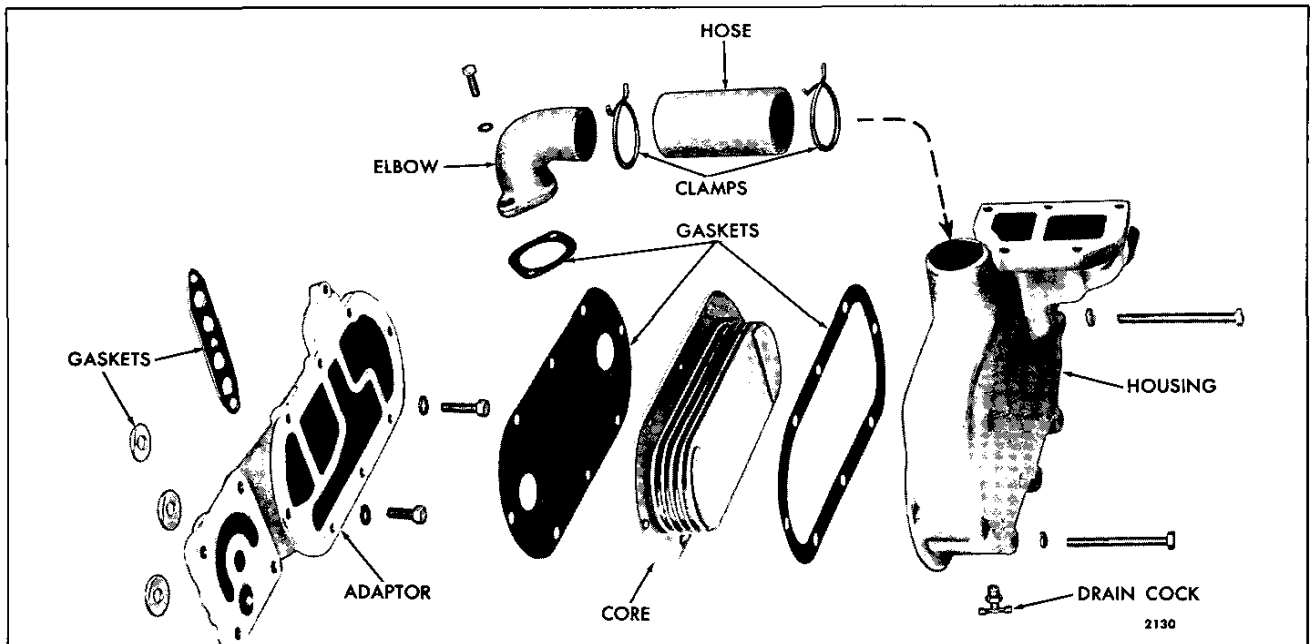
Oil Cooler Details and Relative Location of Parts (In-Line Engine)
